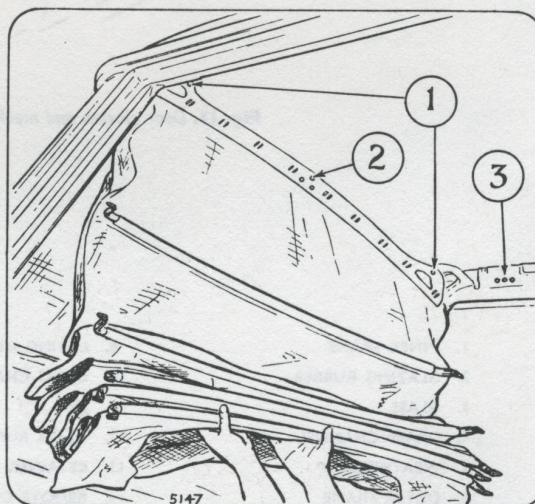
Headlining refitting showing retention of header pad (Rapier)
